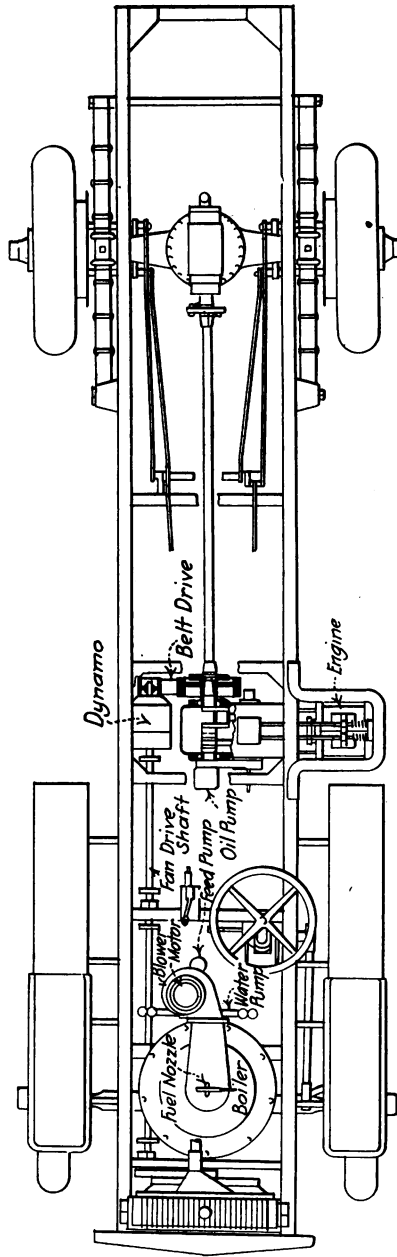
PLAN VIEW OF THE COMPLETE TRUCK SHOWING THE LOCATION OF THE CRANKSHAFT, THE DRIVE-SHAFT AND THE DYNAMO
